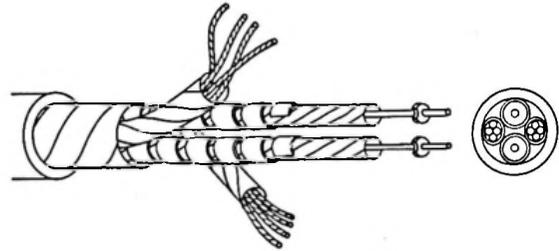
Typical Concentric (Coaxial) Cable Assembly
